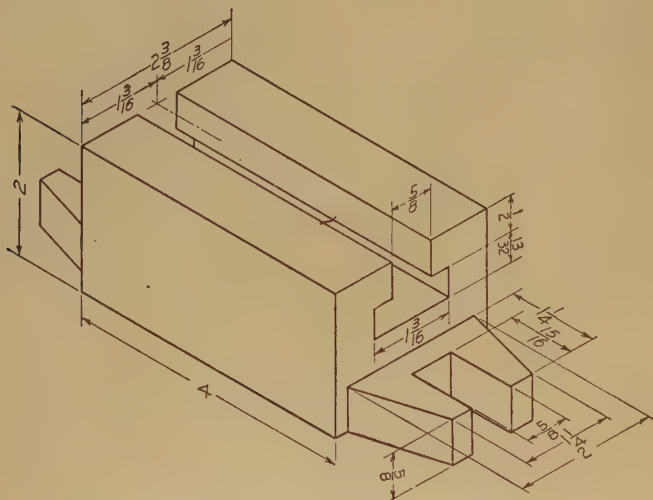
Dimensioning a pictorial drawing (anchor block).
